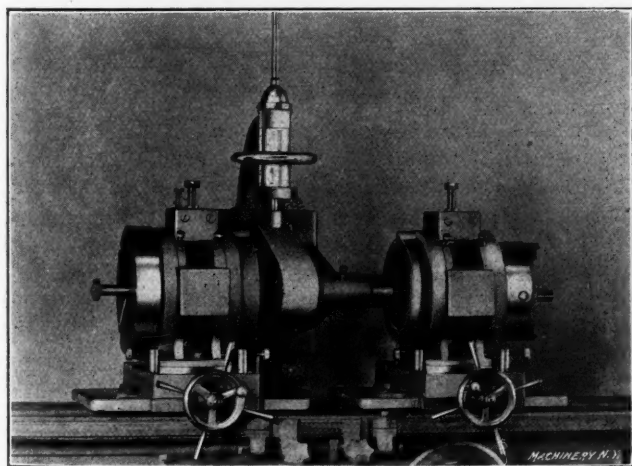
Headstocks on No. 2½ Grinder, with Faceplate and Universal Chuck
